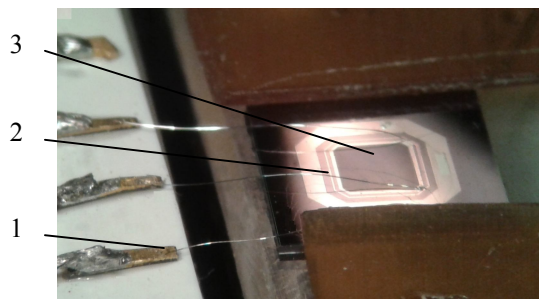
Enlarged image of unpackaged detector with attached wire jumpers: 1 – intermediate contact; 2 – wire jumper; 3 – unpackaged detector
